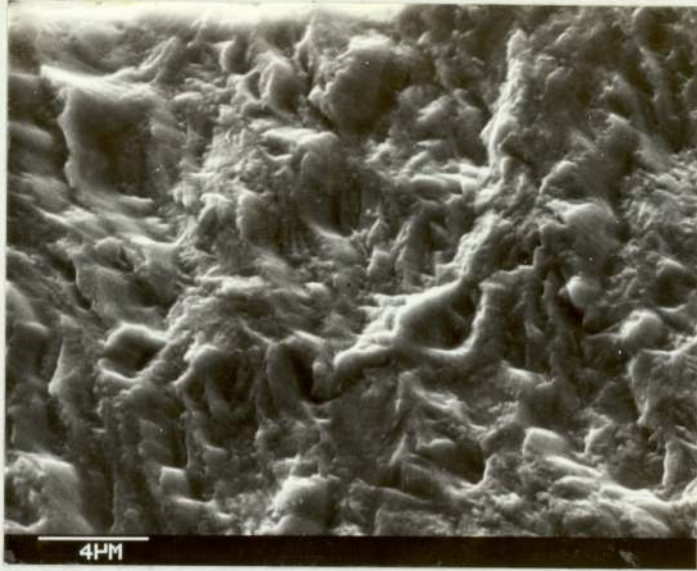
Fatigue fracture of case in induction hardened O80A47, location: notch root, midsection, root radius 0.36 mm,  $N_i$  or  $N_f = 254,000$
